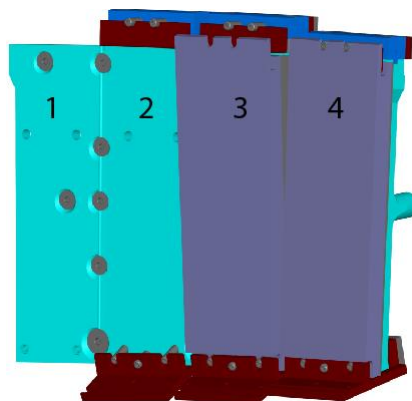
Shows the assembly procedure for Div-III. (1) Pure water cooled back plate, (2) Upper and lower clamping claw mounted, (3) Solid tungsten target moved into the lower clamping claw and finally (4). The target is clamped by the upper and lower claw to the cooled back plate.
